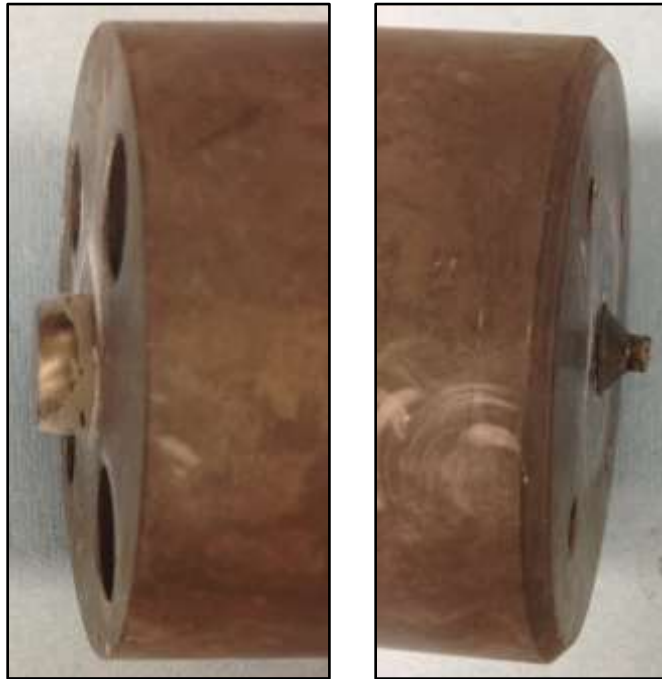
Top (left) and bottom (right) of holder after extrusion 5
